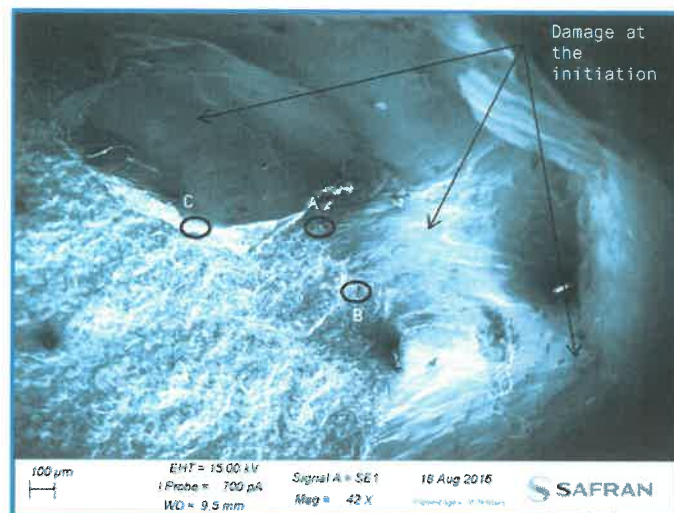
Close-up view near the initiation of fracture surface 2 showing fatigue locations.
